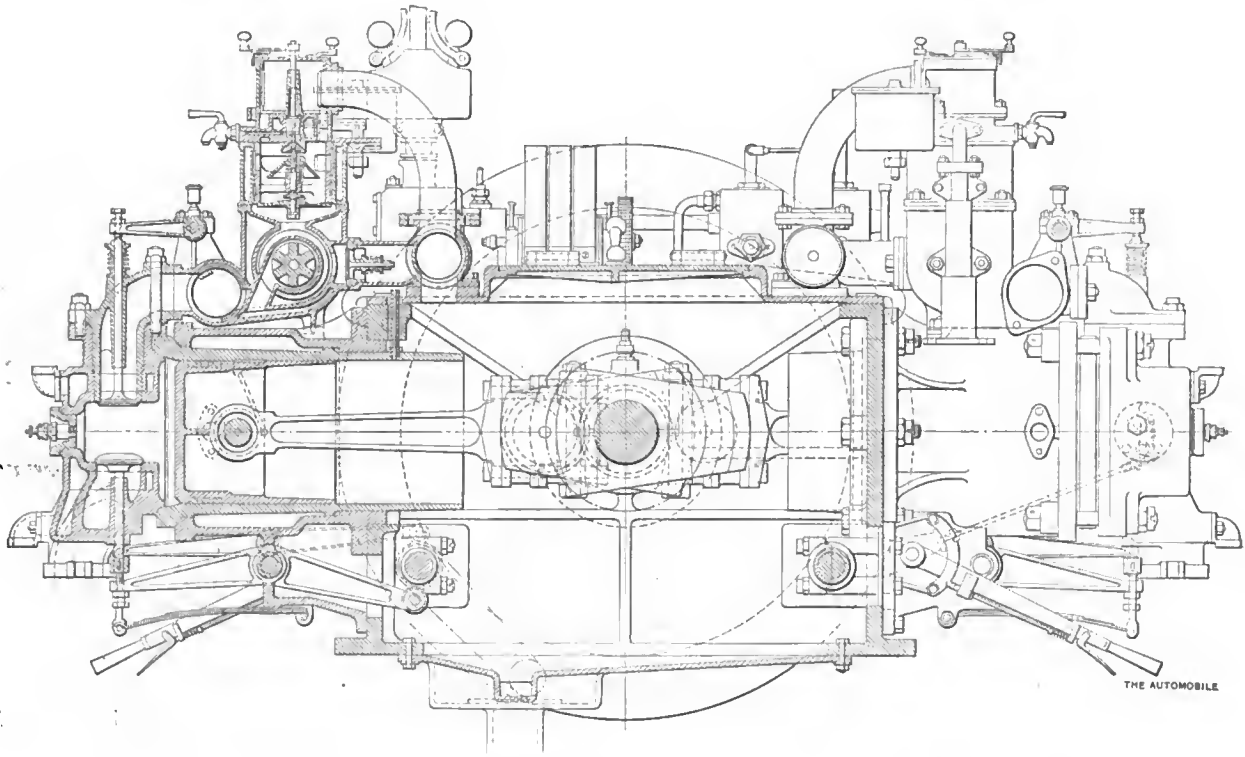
TRANSVERSE VIEW OF THE 140-HORSEPOWER 6-CYLINDER OPPOSED WOLSELEY MOTOR, PARTLY IN SECTION.
